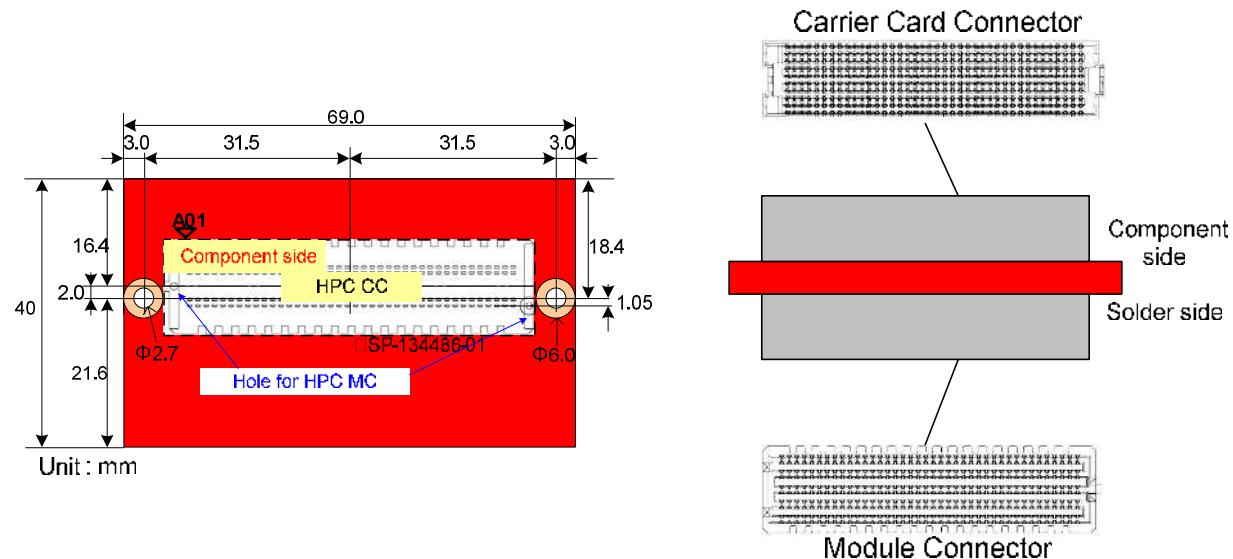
Layout of the TB-FMCH-STACK Board Components
